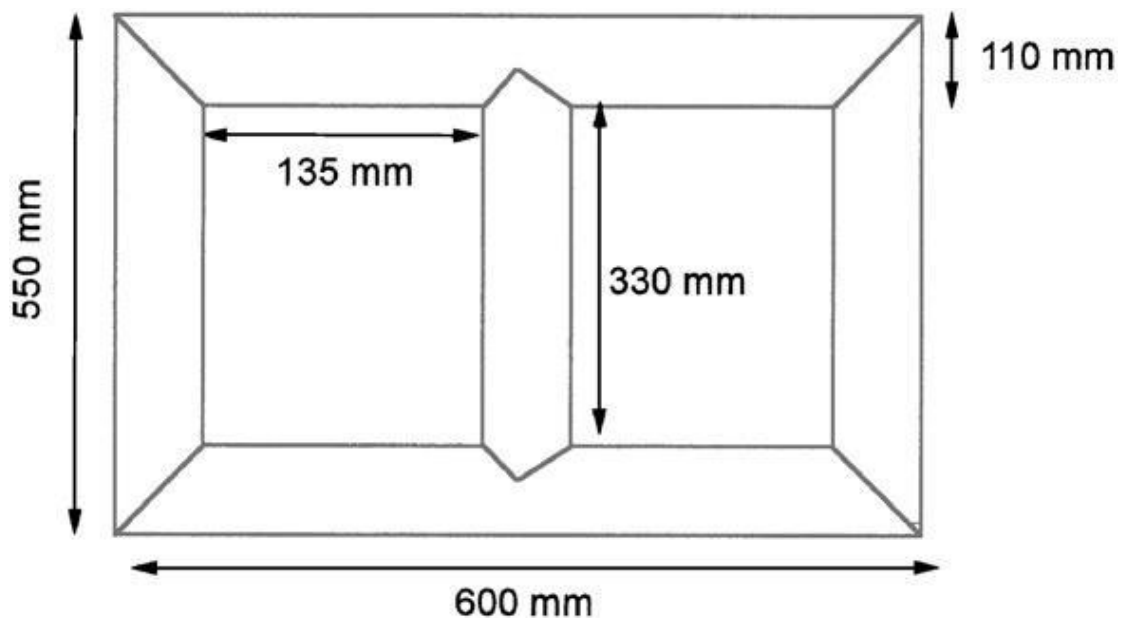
The 3-phase, 3-limb transformer core dimensions investigated in [61].
